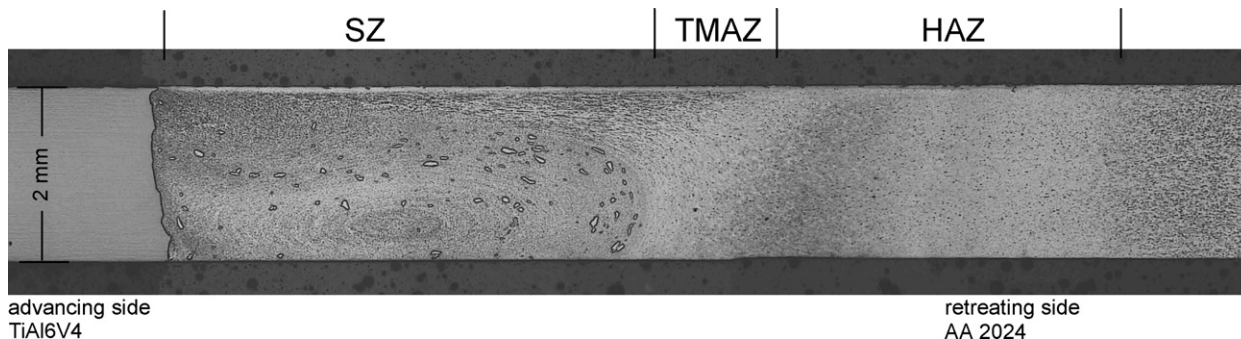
shows a macroscopic overview of the as-welded cross-section of the dissimilar friction stir welded joints of TiAl6V4 and AA2024-T3. Because the welding tool was shifted towards the Al alloy, the stirred zone (SZ) occurs mainly on the Al side of the joint. The SZ reveals a mixture of fine recrystallized grains of Al
